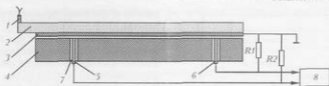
Scheme of experiments on investigation of variations in temperature of surfaces of the explosion welded metal plates in the initial and end sections of a pack: 1 – electric detonator; 2 – explosive charge; 3 – flyer copper plate; 4 – target plate; 5, 6 – constantan rods; 7 – insulator; 8 – digital memory oscillograph
